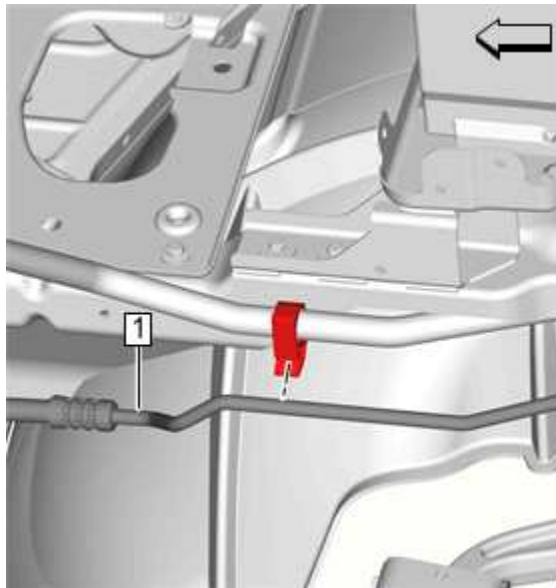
Air Conditioning Evaporator Tube And Air Cleaner Bracket
